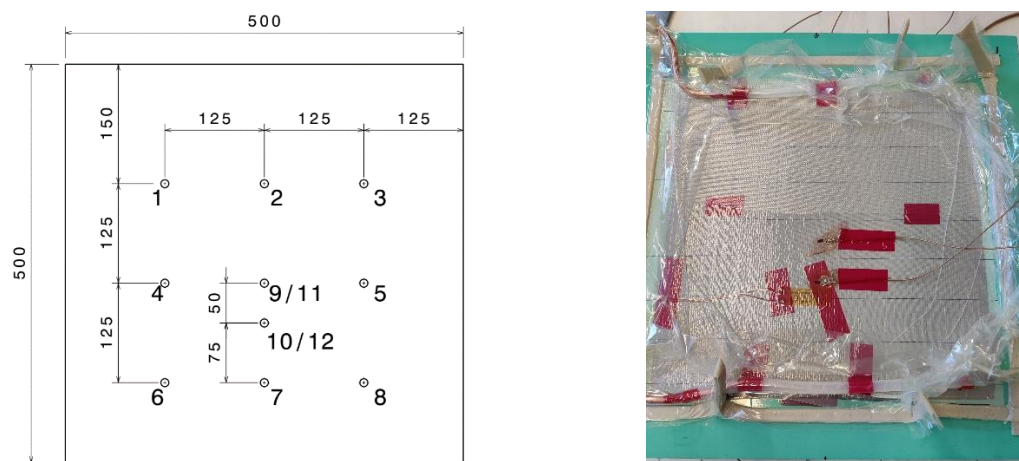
Transducer positions for each test mold plate (left) and photo of test laminate inside vacuum bagging with integrated piezoelectric transducers on top (right)
